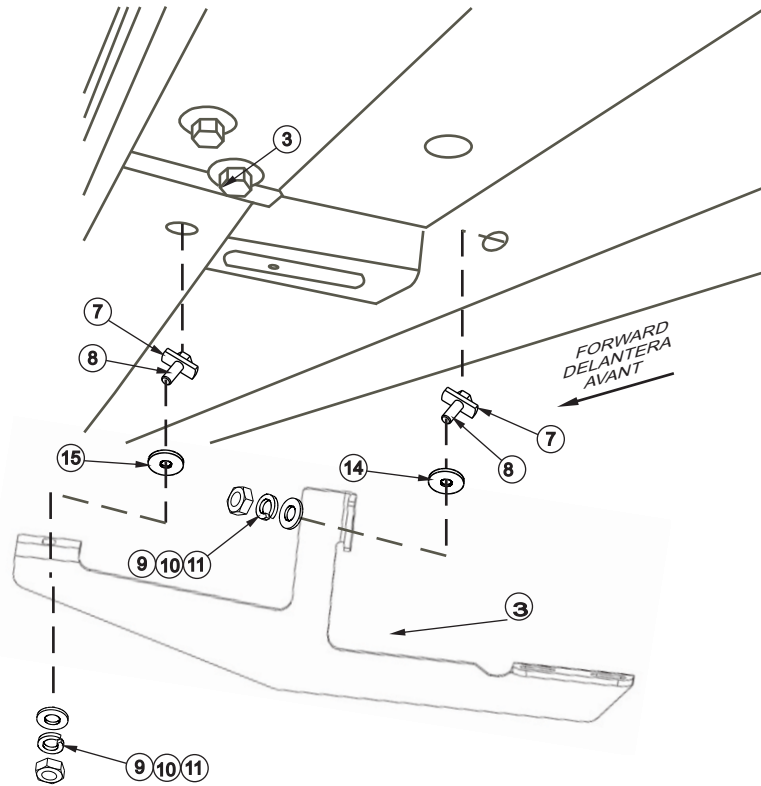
INSTALLATION OF FRONT DRIVER SIDE SHOWN. PASSENGER SIDE OPPOSITE.
